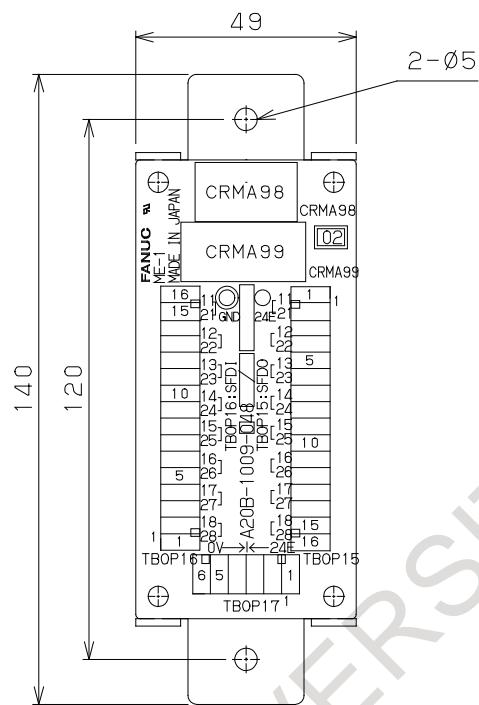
(b) Additional safety I/O terminal conversion board
